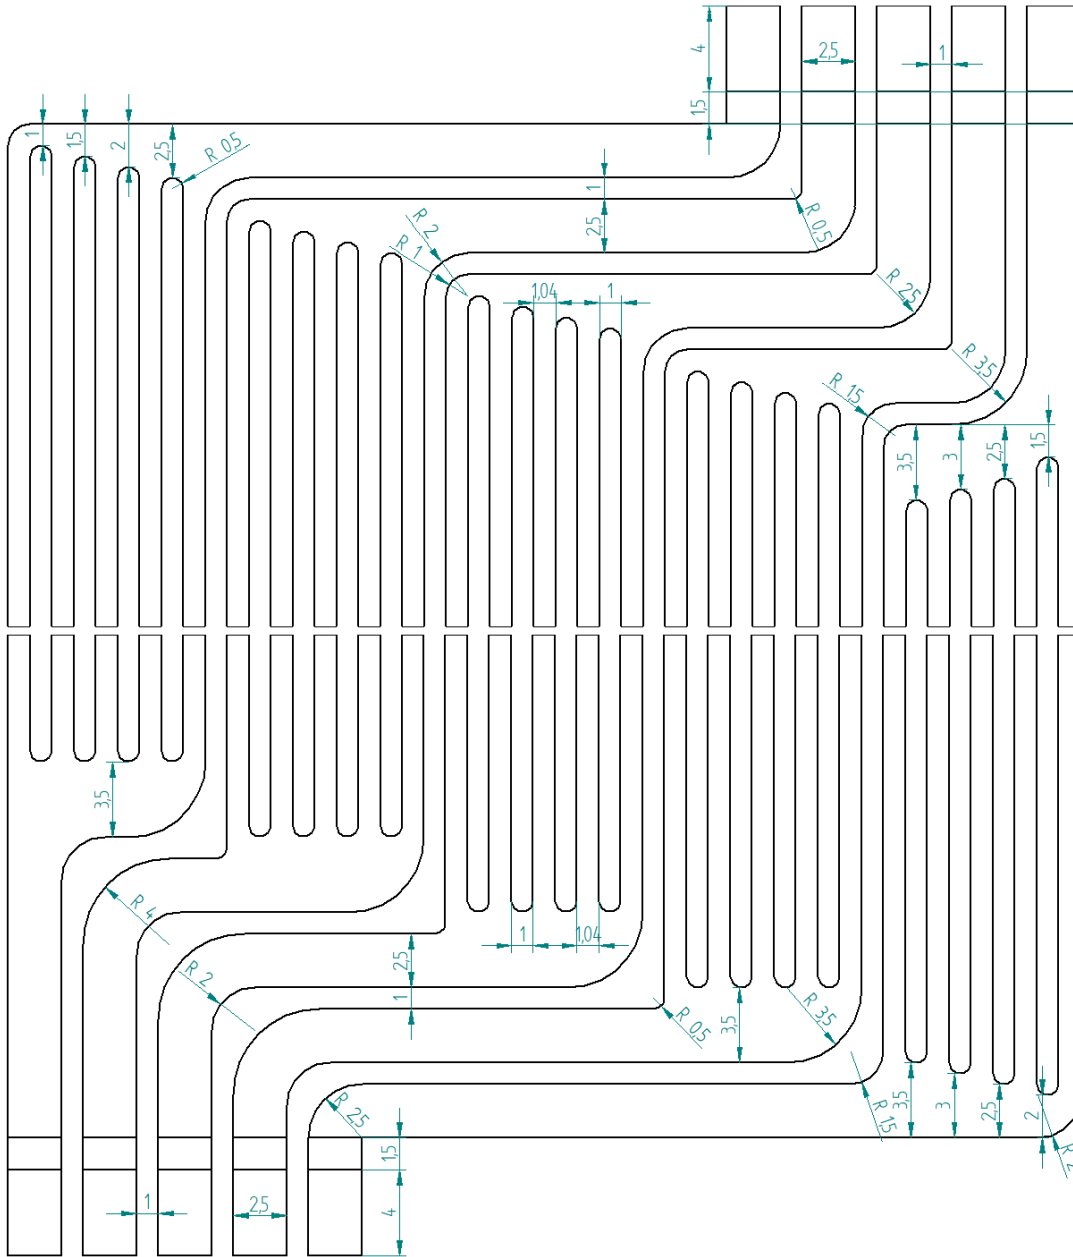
Dimensions of the inlet(upper) and outlet(lower) side of the final flow field.
